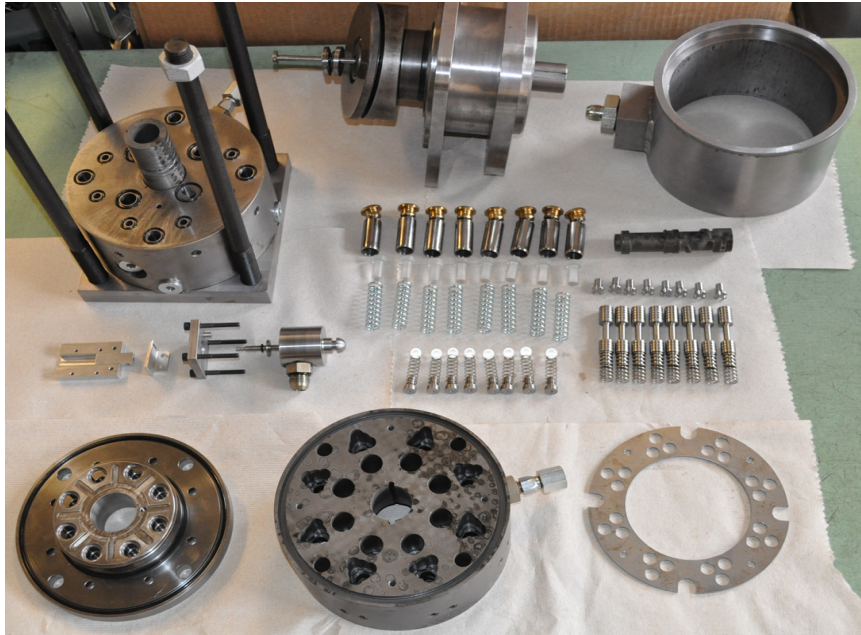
Manufactured parts used to build the discrete piston pump/motor
